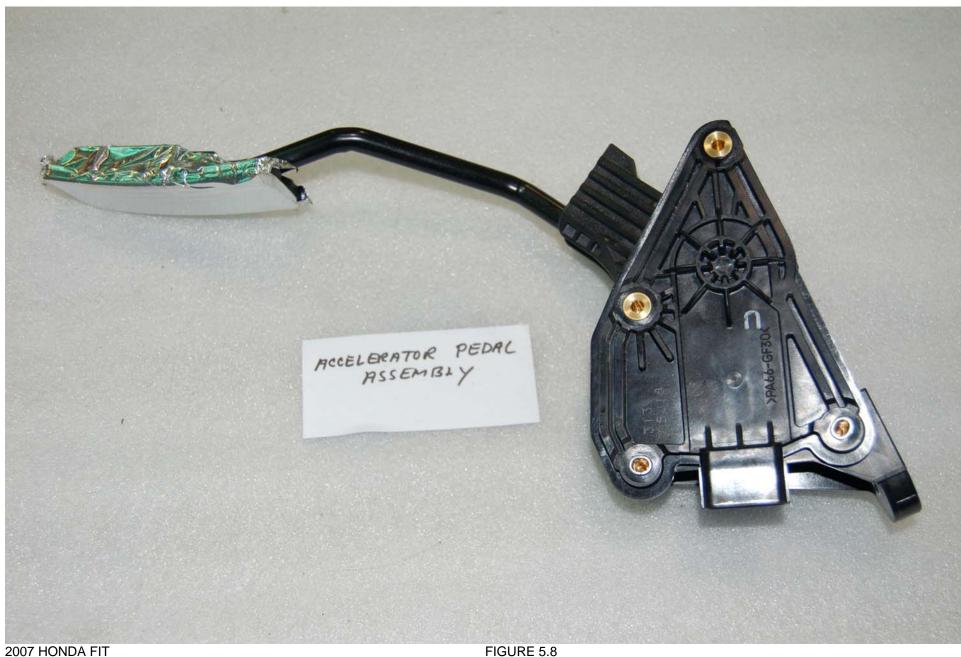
ACCELERATOR PEDAL ASSEMBLY
